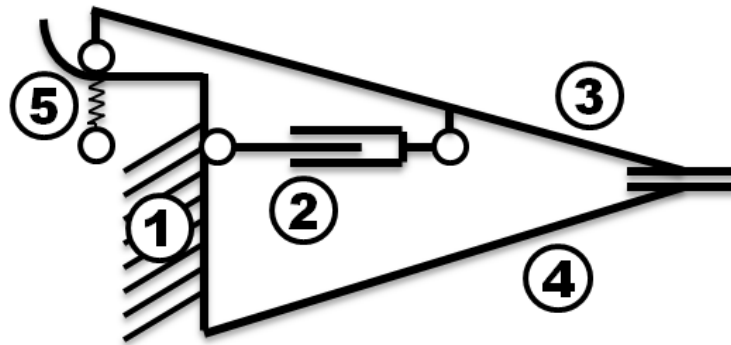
Gripper schematics, 1-Gripper frame, 2-Motor block, 3-Upper finger, 4-Lower finger; 5-Flexible beam.
